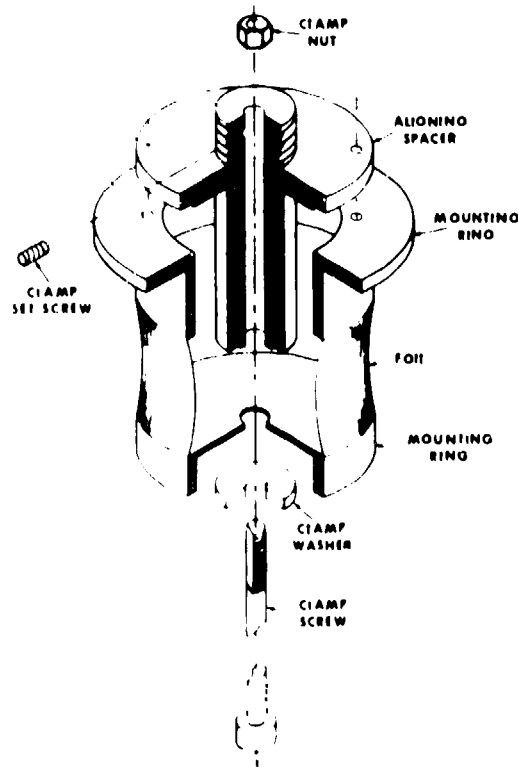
Assembly for fabrication and insertion of ultrathin aluminum foils.
